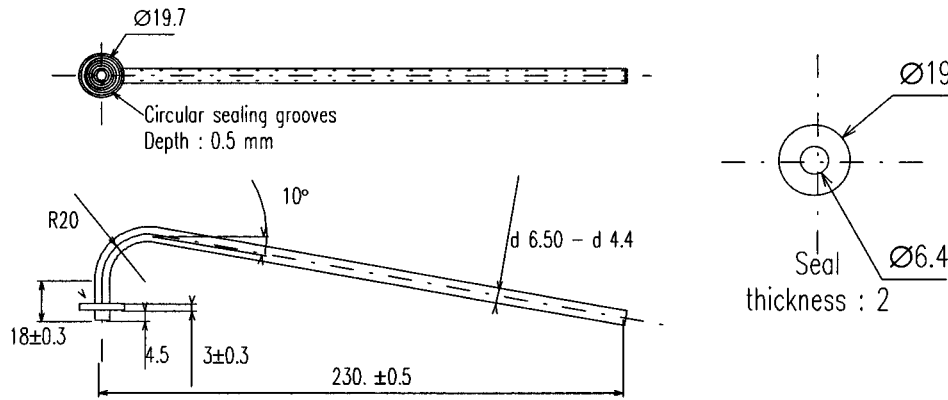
Extraction Tube (Stainless Steel) with Its Seal (Details 3 and 4 of Fig. 7)
